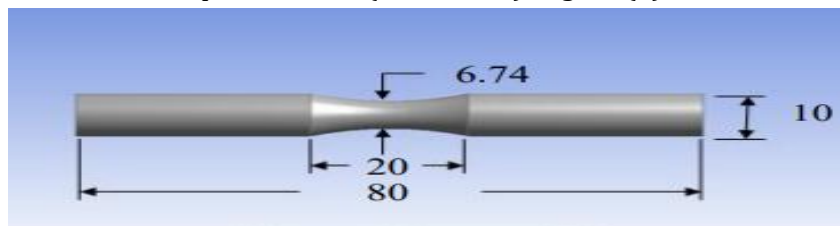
Fatigue test specimen, All dimensions in (mm) according to (DIN 50113) standard specification.
